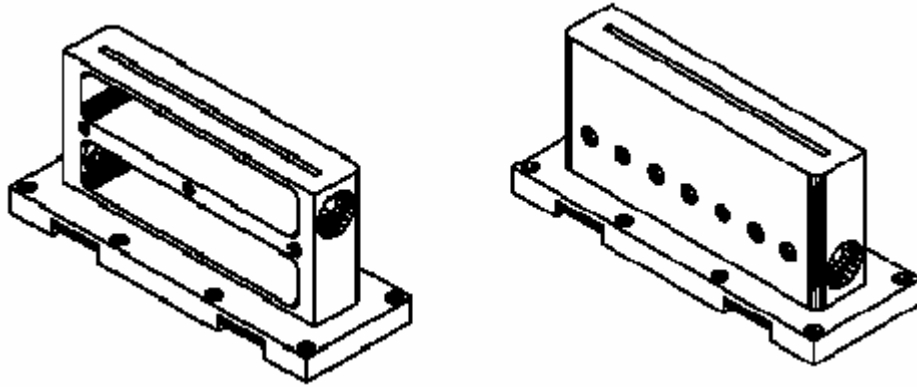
Missing plate view (left) and intact outer surface view (right) of the slotted inner cartridge from AutoCAD 2006.
